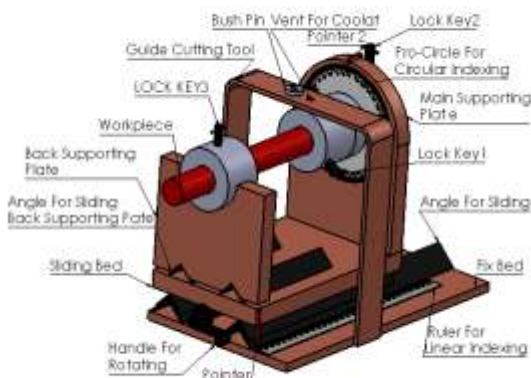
DESIGN OF MODIFIED DRILLING JIG WITH COMPONENT DETAILS
